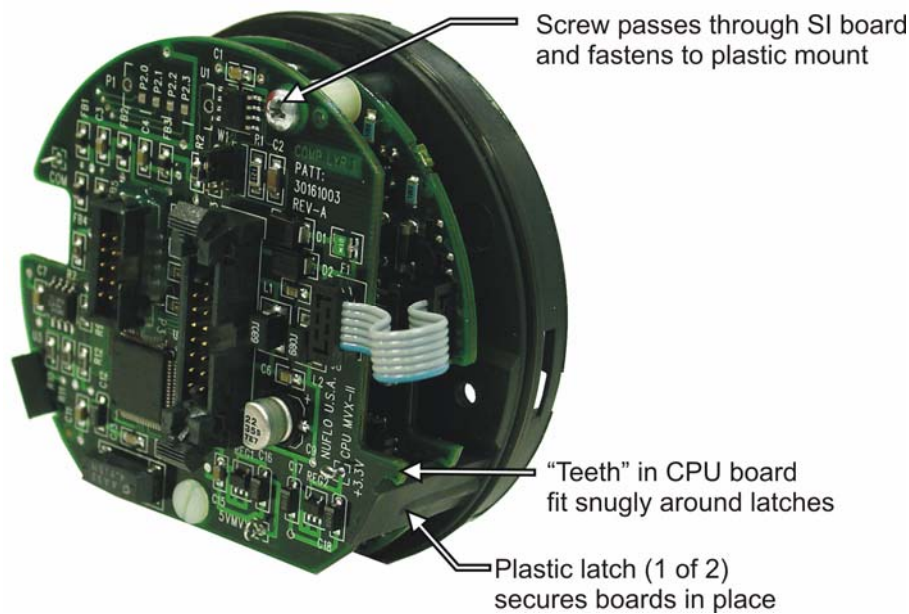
Latching mechanisms for CPU/SI board assembly
